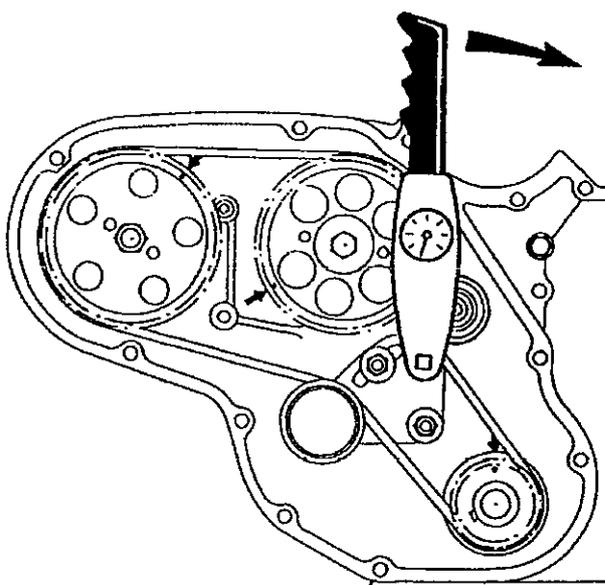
Adjusting belt tension using direct scale read-off torque wrench
